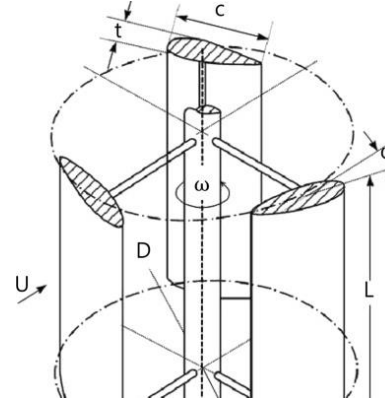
3D view of straight-bladed Darrieus wind turbine.
